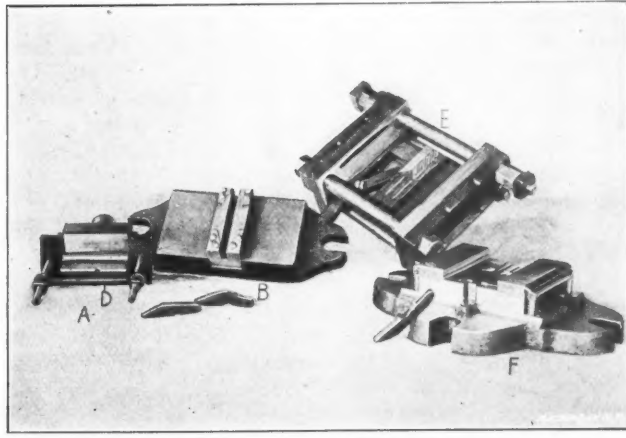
Jaw Forming Punch and Die and Serrating Tools
